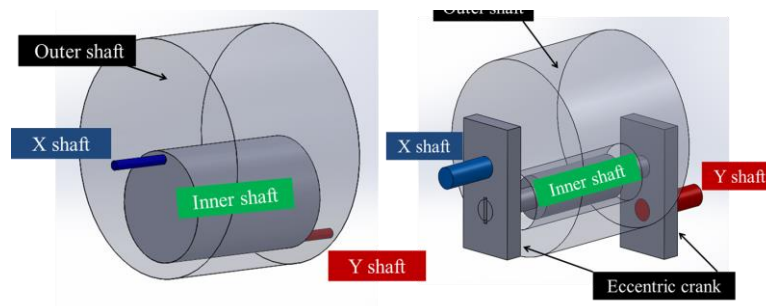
Additional crank. Eccentricity is expanded by means of an additional crank, the use of which allows the diameters of the inner and outer shafts to be reduced.
